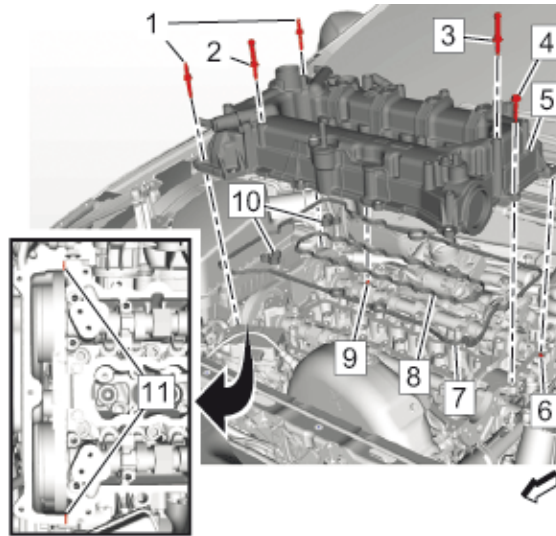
Camshaft Cover, Studs, Bolts And Gaskets
